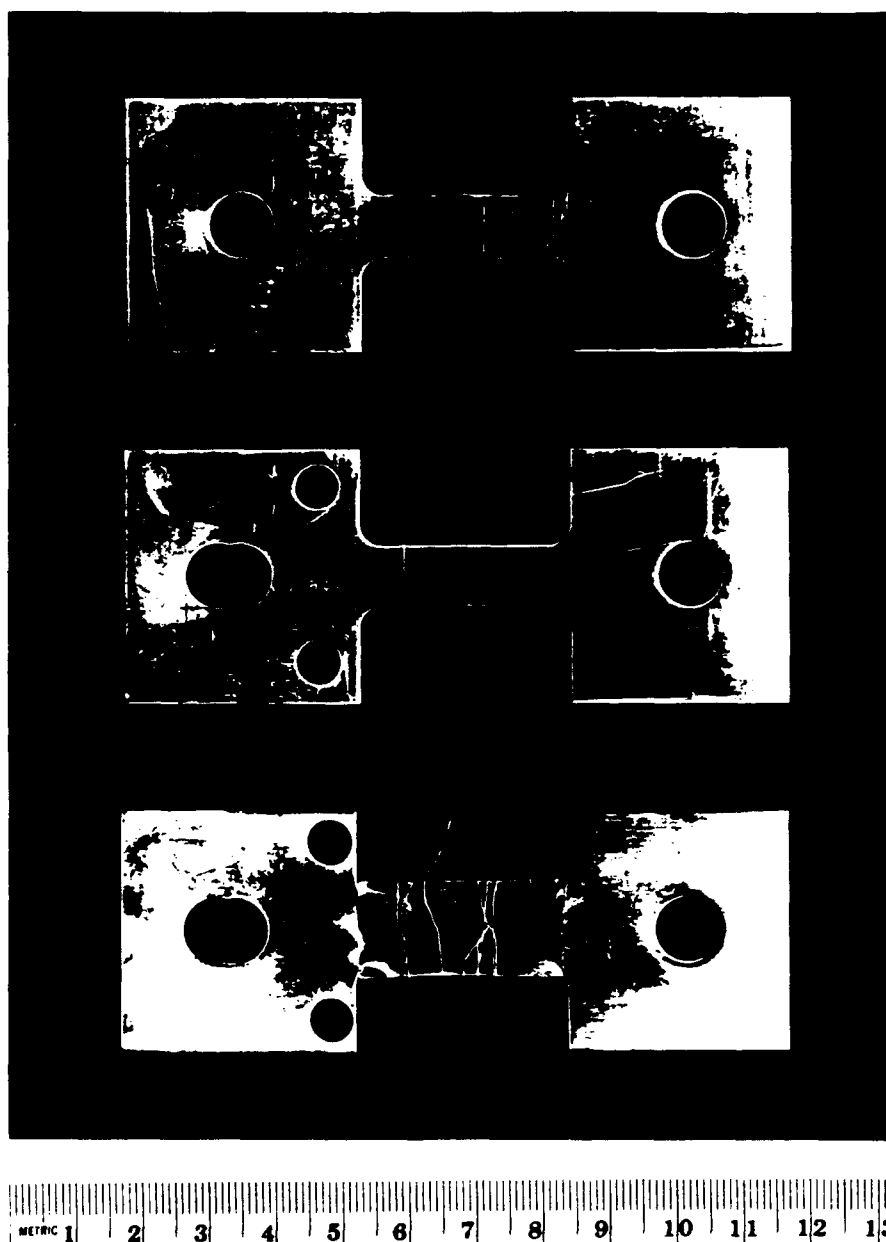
a) Specimen after punching or machining, b) modified shape of the specimen, and c) sample wrapped in niobium foil. For further details see section 3.2.2
